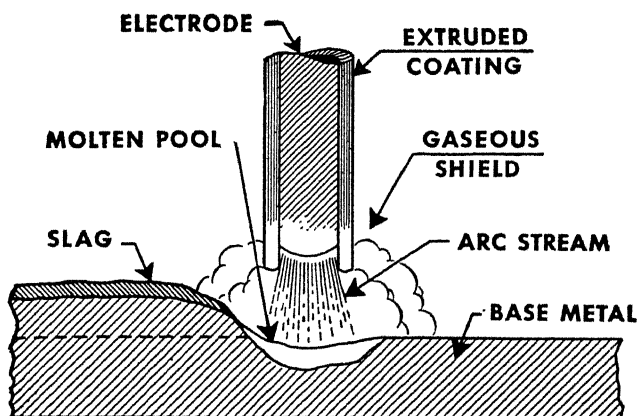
Diagrammatic sketch showing shielding of arc and slag protection of weld metal while cooling.
